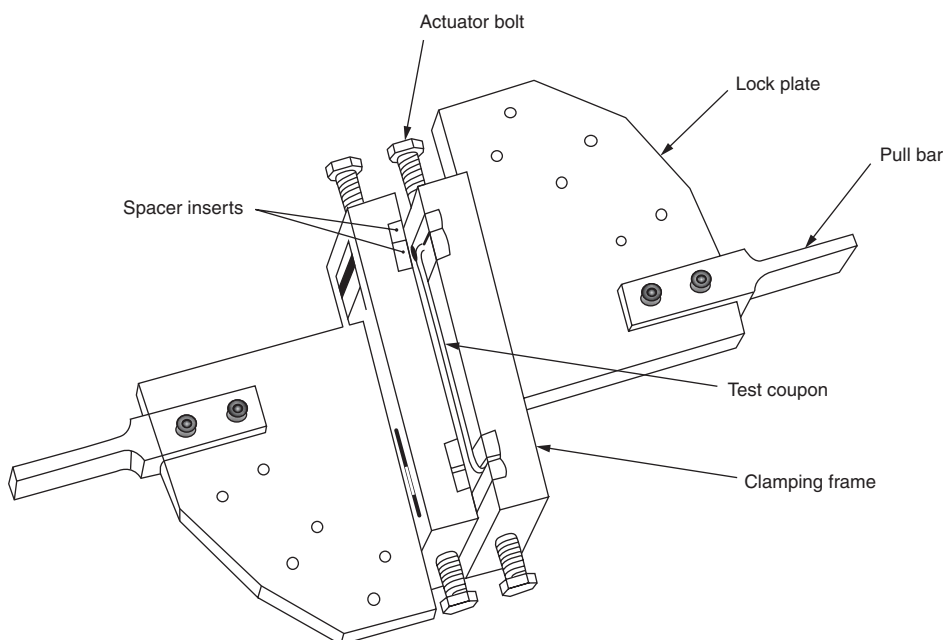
Fixture for testing spot welds under simultaneous tension and shear loading. Source: Ref 16
